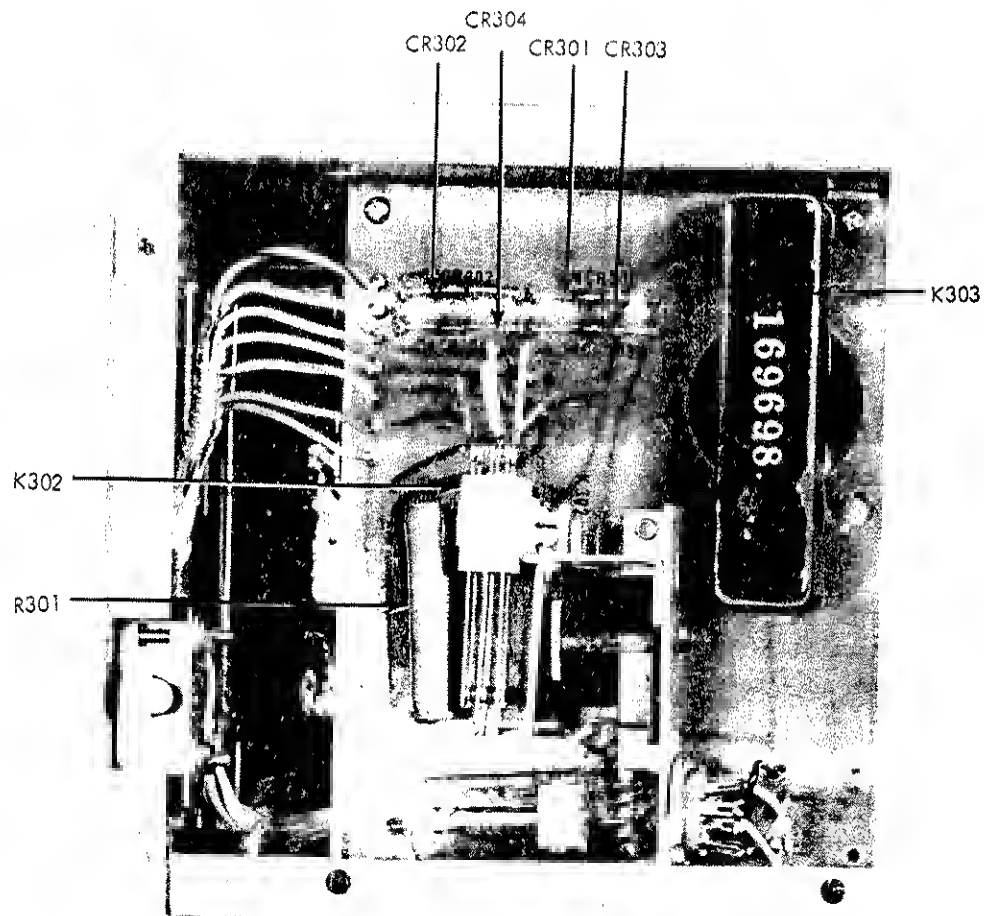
TIME DELAY CIRCUIT BOARD ASSEMBLY
